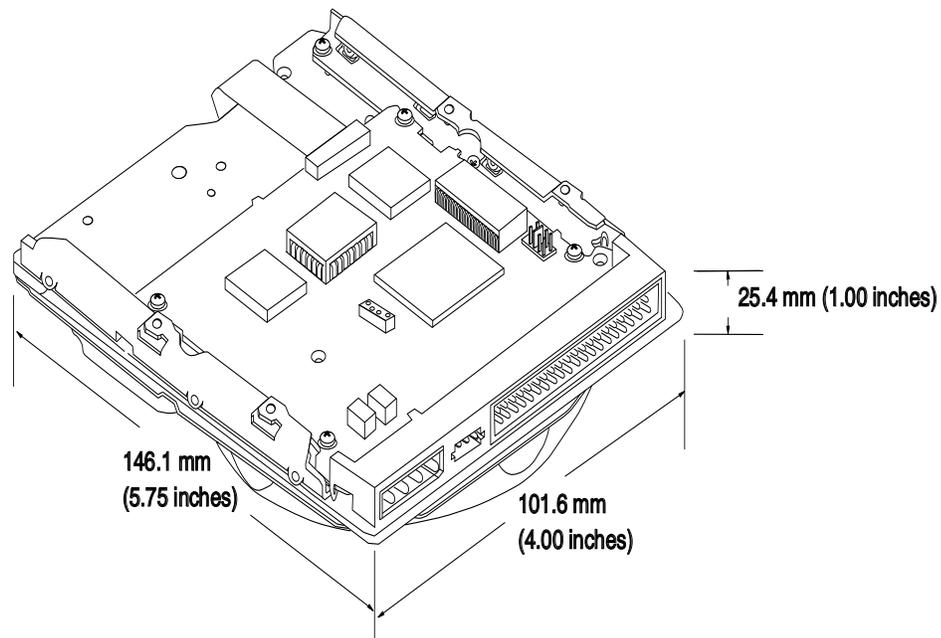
Mechanical Dimensions for Quantum Fireball TM (One-Disk) Drive
